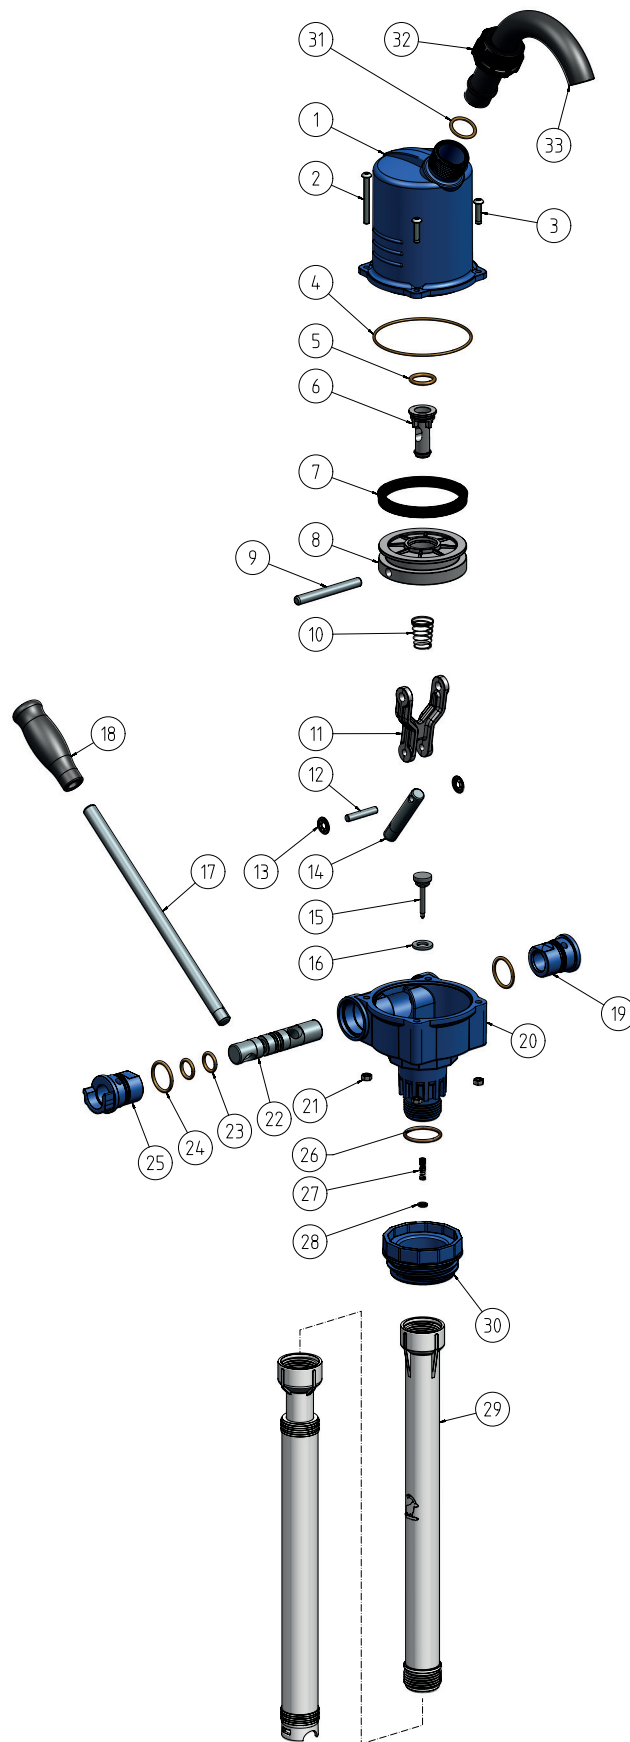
1: Exploded view of the barrel pump for urea (AdBlue®) with discharge spout
